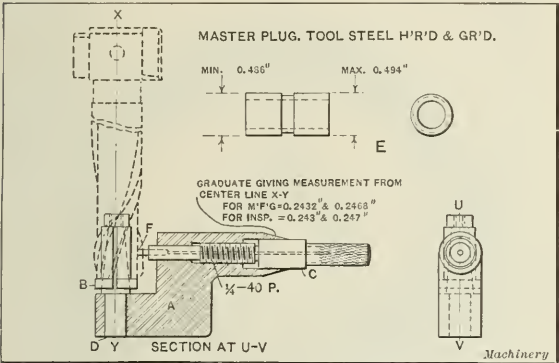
Micrometer Type of Indicating Gage used for testing Rifle Part
